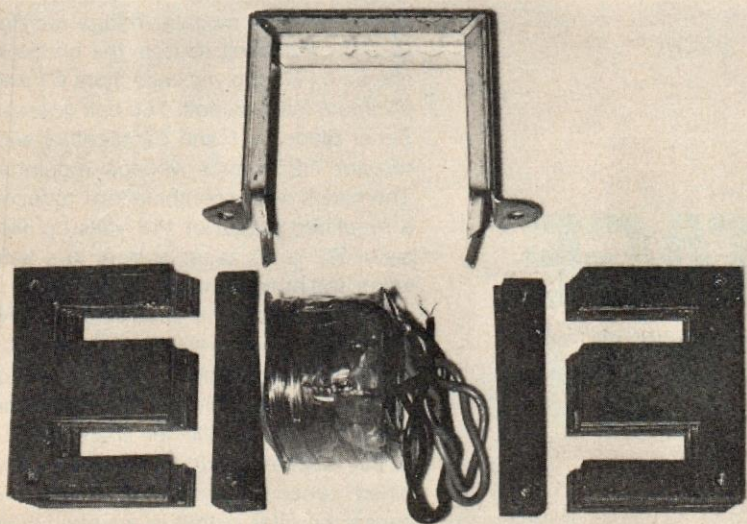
Transformer T1 can be made by modifying a readily available model. This shows the parts of the transformer disassembled and ready for re-winding.
